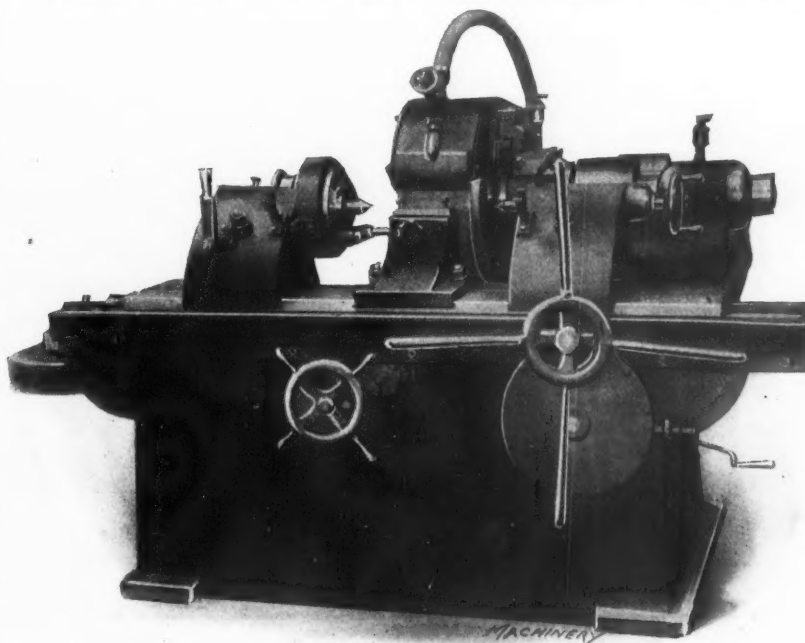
Bridgeport Grinding Machine with Wide Faced Wheel
